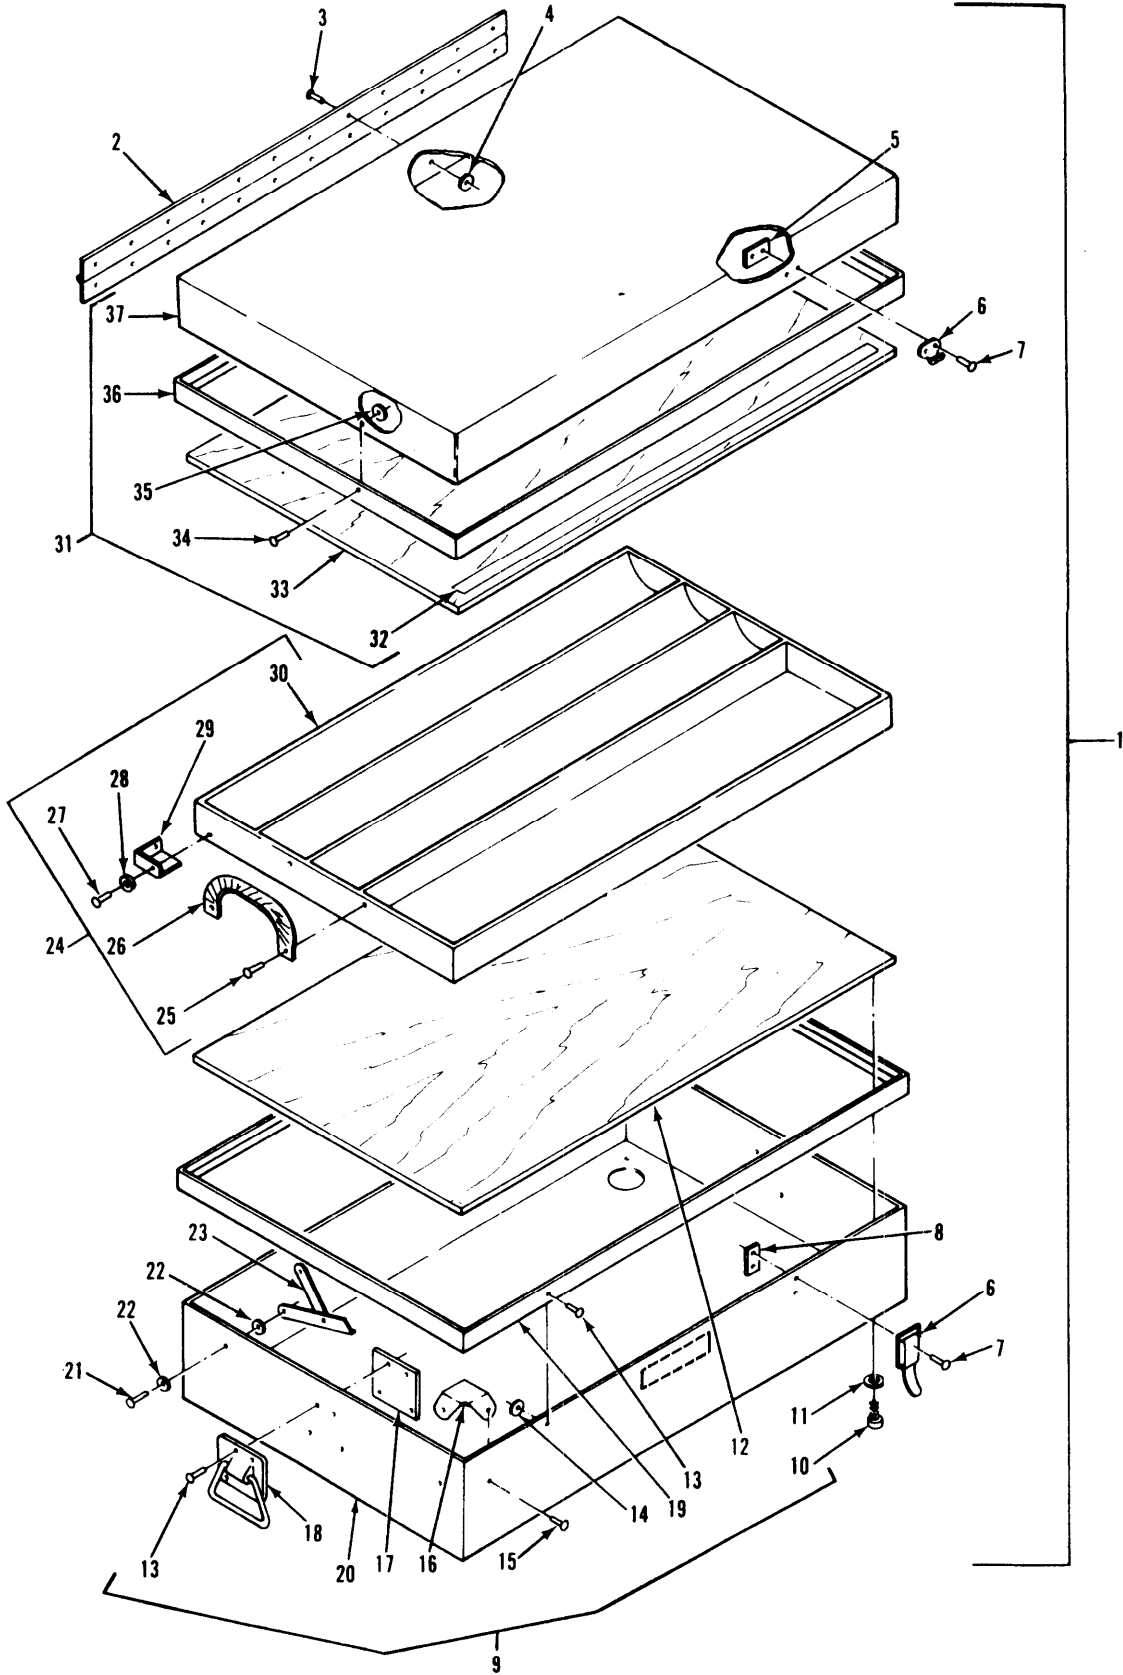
Supply Case Assembly (Sheet 1 of 2)
